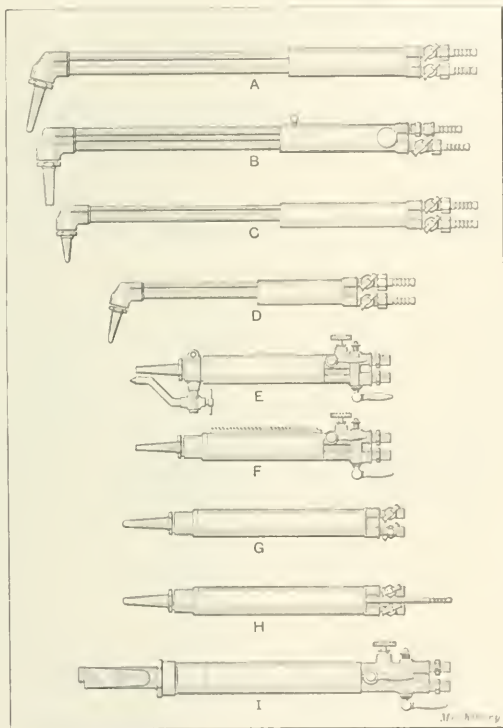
Different Types of Cutting and Welding Torches
